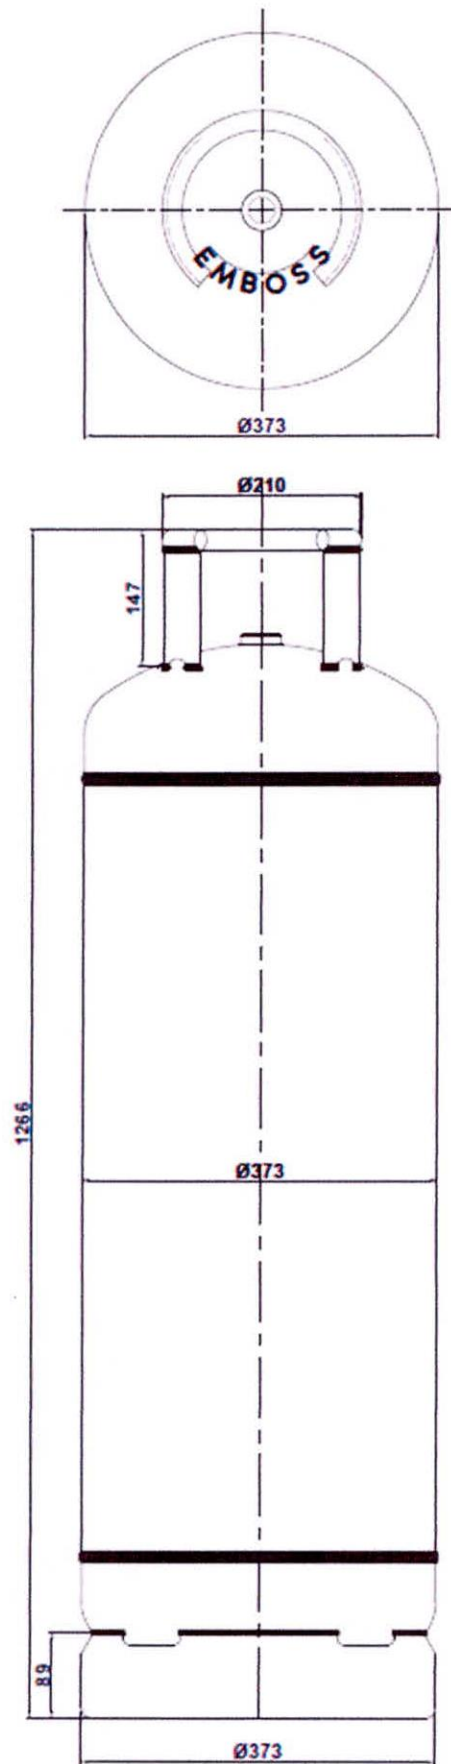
50.0 kg 373 mm diameter assembly details
